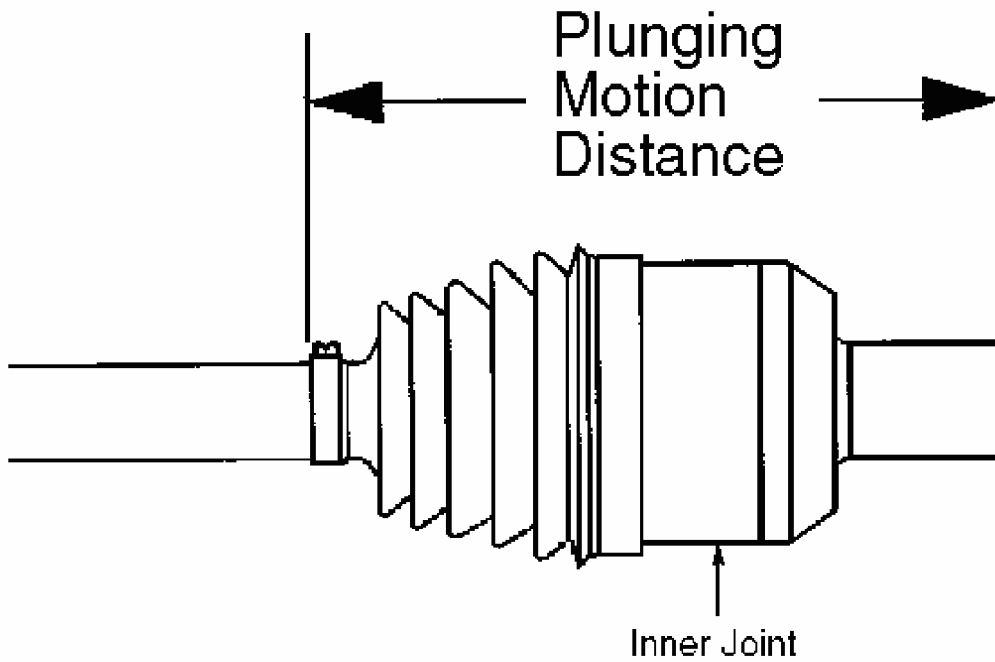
Positioning Axle Shaft Small Seal Retaining Clamp
